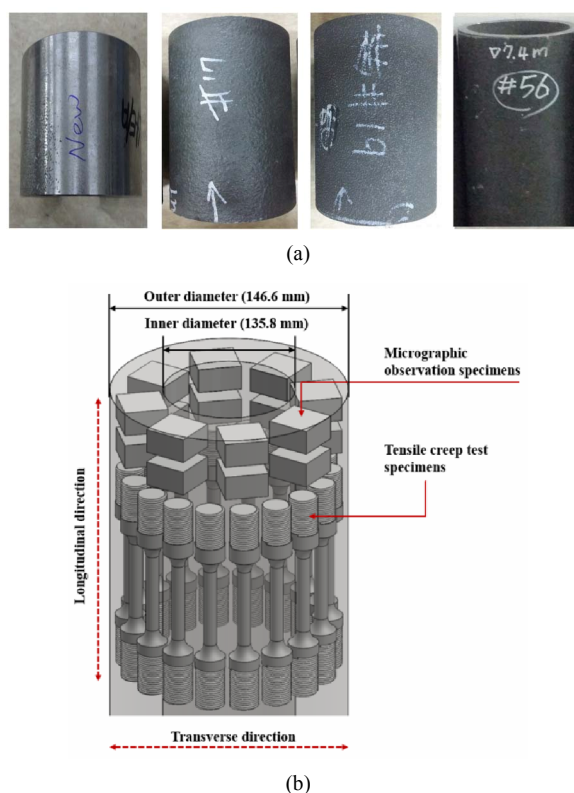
(a) Photographs of the reformer tubes; (b) specimen geometry.
